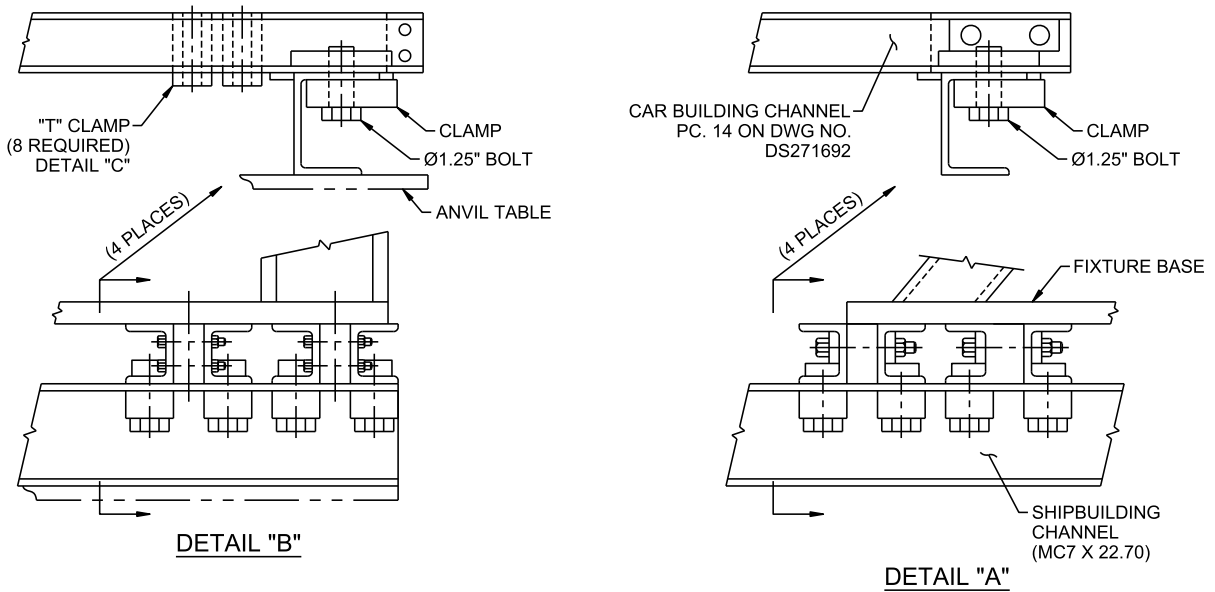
90-degree test fixture assembly. (Sheet 1 of 2)
